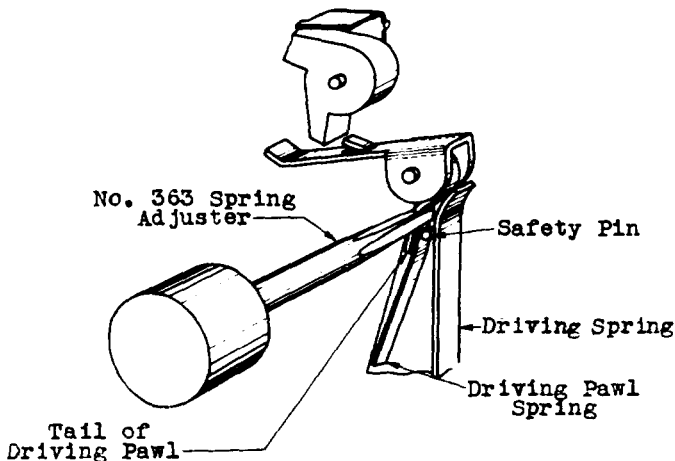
Method of Adjusting Tail of Driving Pawl
